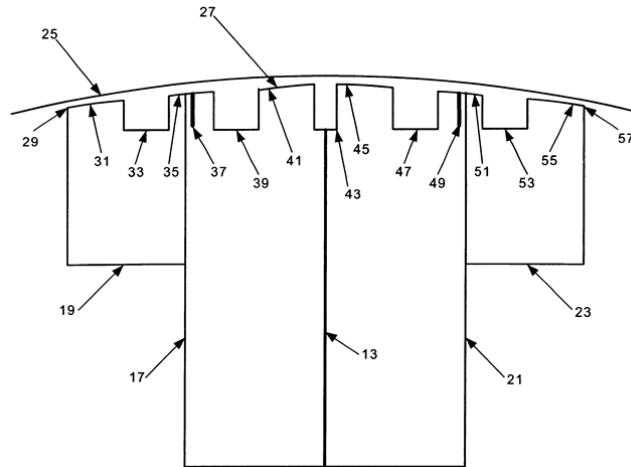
Drawing showing the cross-section of a commercial tape head cut along the yellow dashed line shown in Figure 1.13(a). Important parts of the tape head are referred to according to their numbers. [66].
